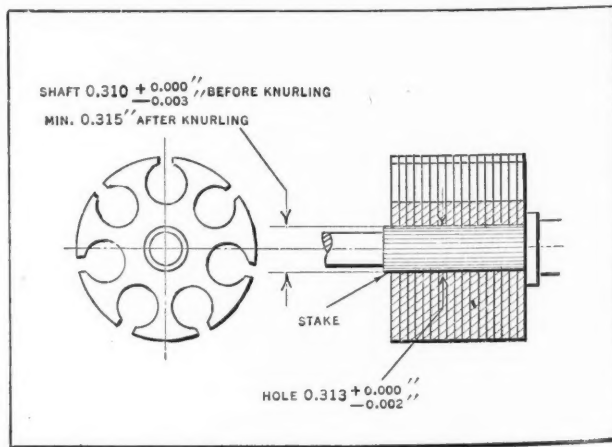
Use of Knurled Shaft for Laminated Core Construction
